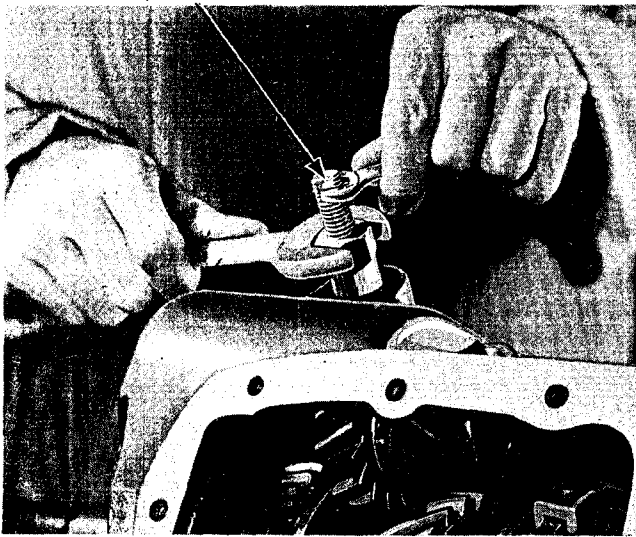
Removal of Pin for Low and Reverse Shifter Shaft
